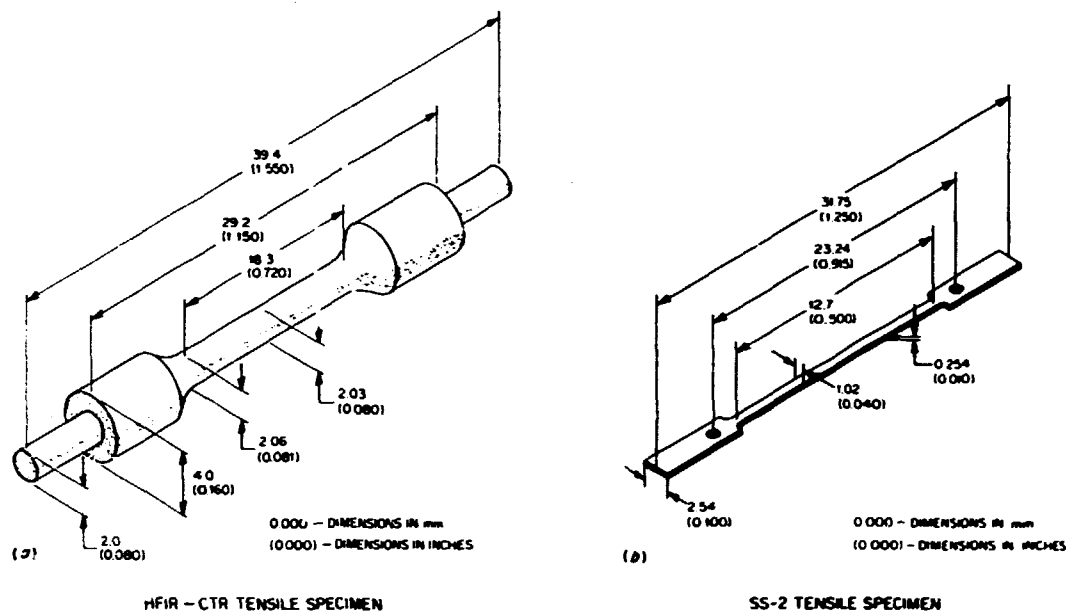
Drawings and dimensions of tensile specimens which were irradiated and then sectioned to obtain TEM specimens. (a) Buttonhead specimens irradiated in HFIR and (b) sheet specimens irradiated in EBR-II.
